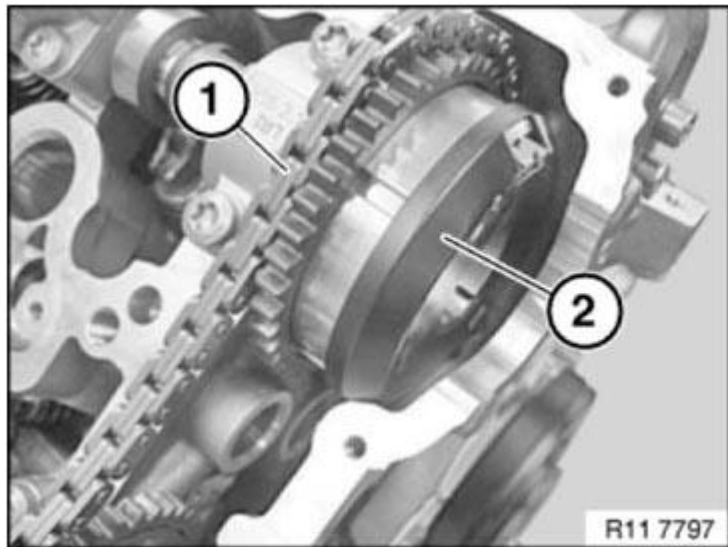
Identifying Exhaust Adjustment Unit And Timing Chain
